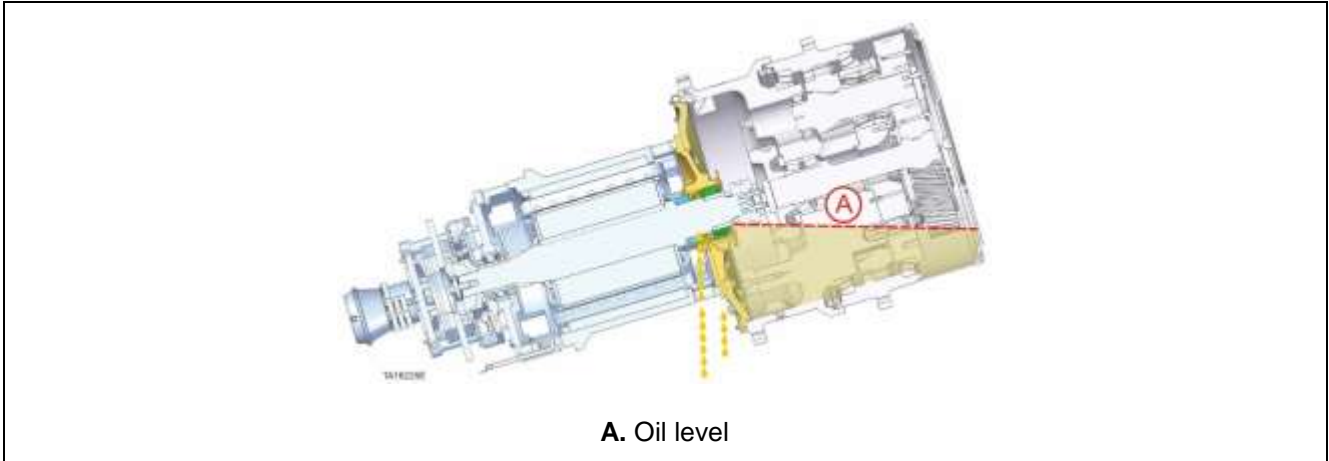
Machine stationary on very steep side slope with oil over labyrinth seal (45 planetary drive shown)
